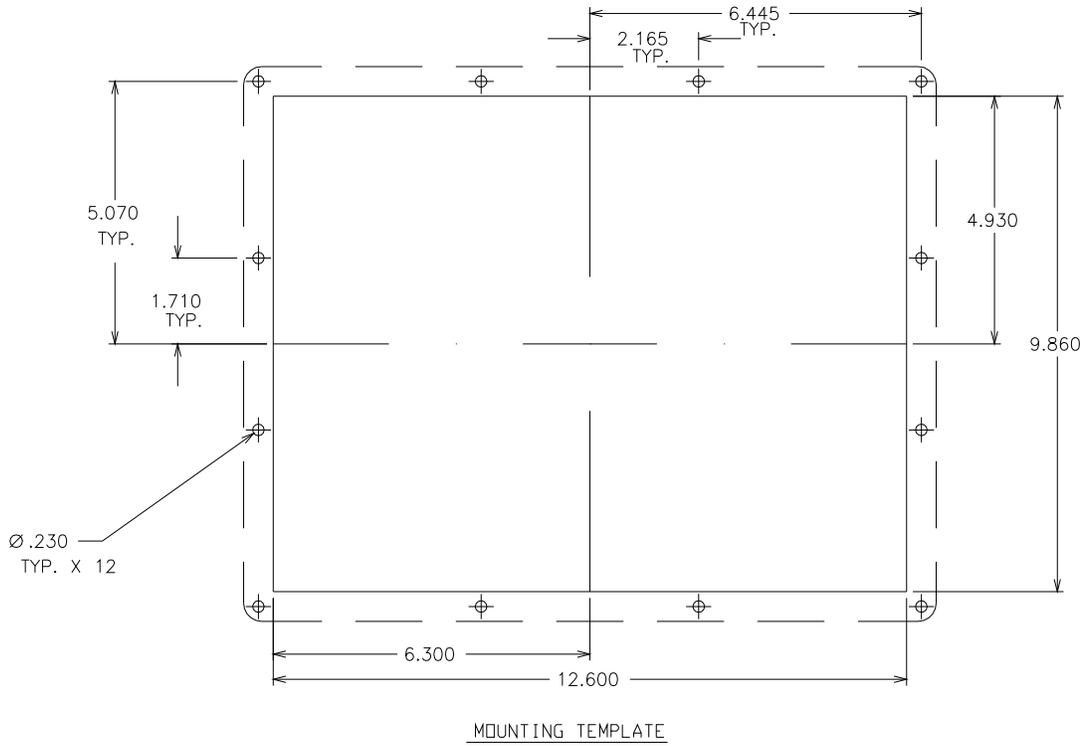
Mounting Template (8236-617, 8236-700, & 8236-701)
